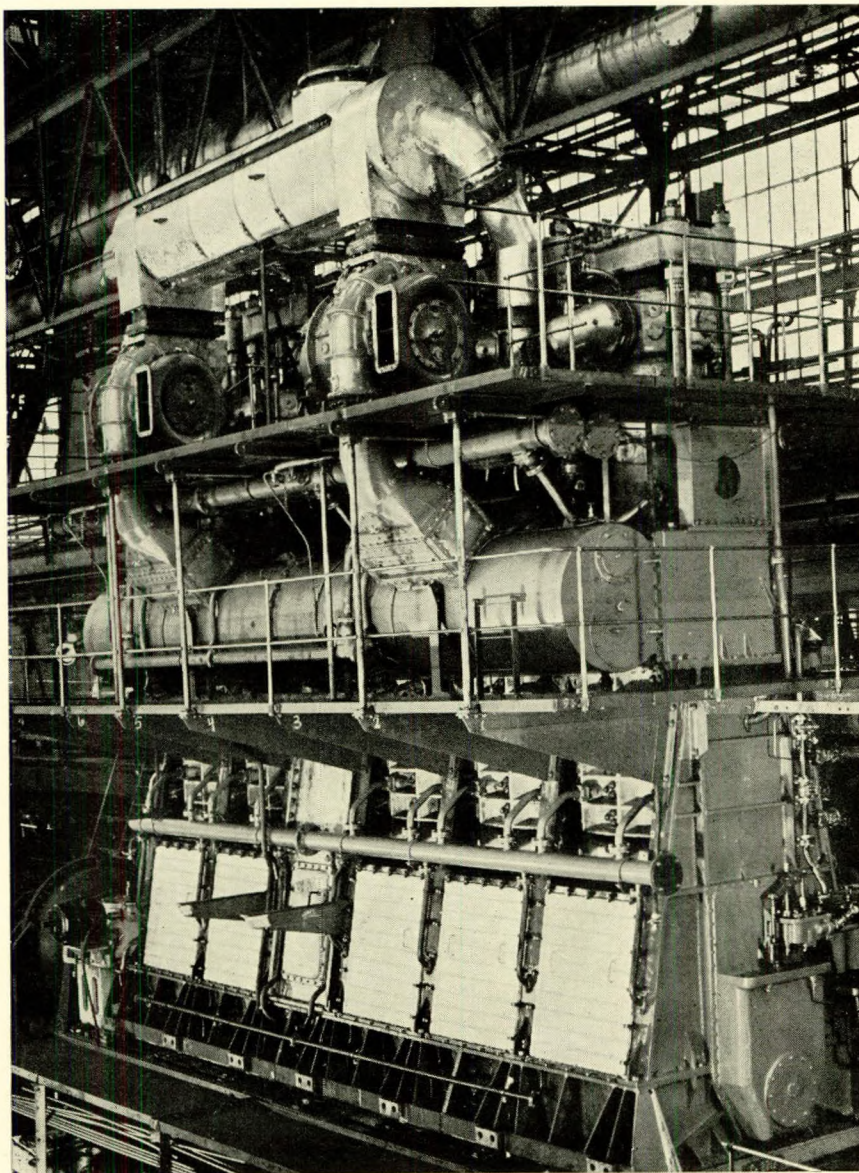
Five-cylinder turbocharged opposed piston engine: cylinder diameter 500 mm. and stroke 1,100 + 400 mm.
